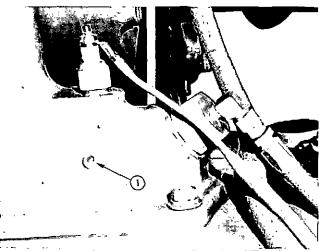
(N11949) Glow plug inspection hole plug - NT engine
